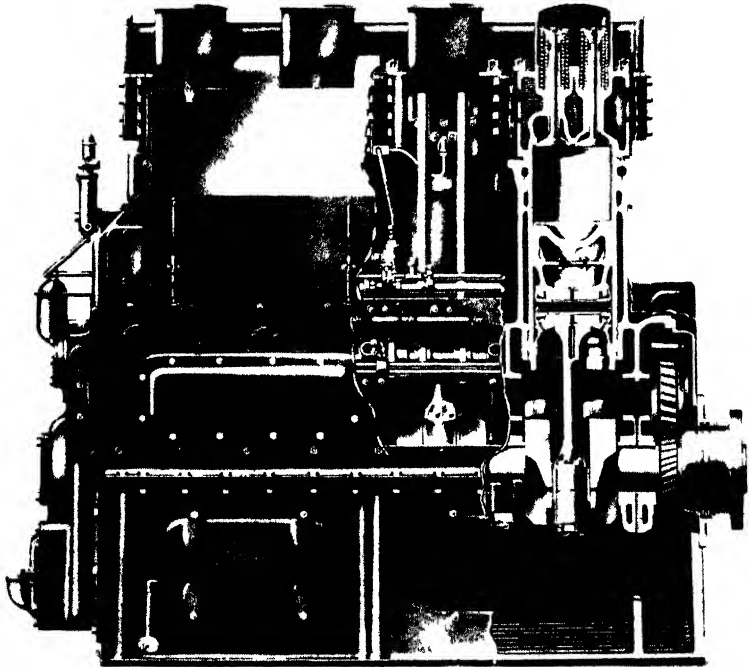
Side section of an Ingersoll Rand Diesel engine.
